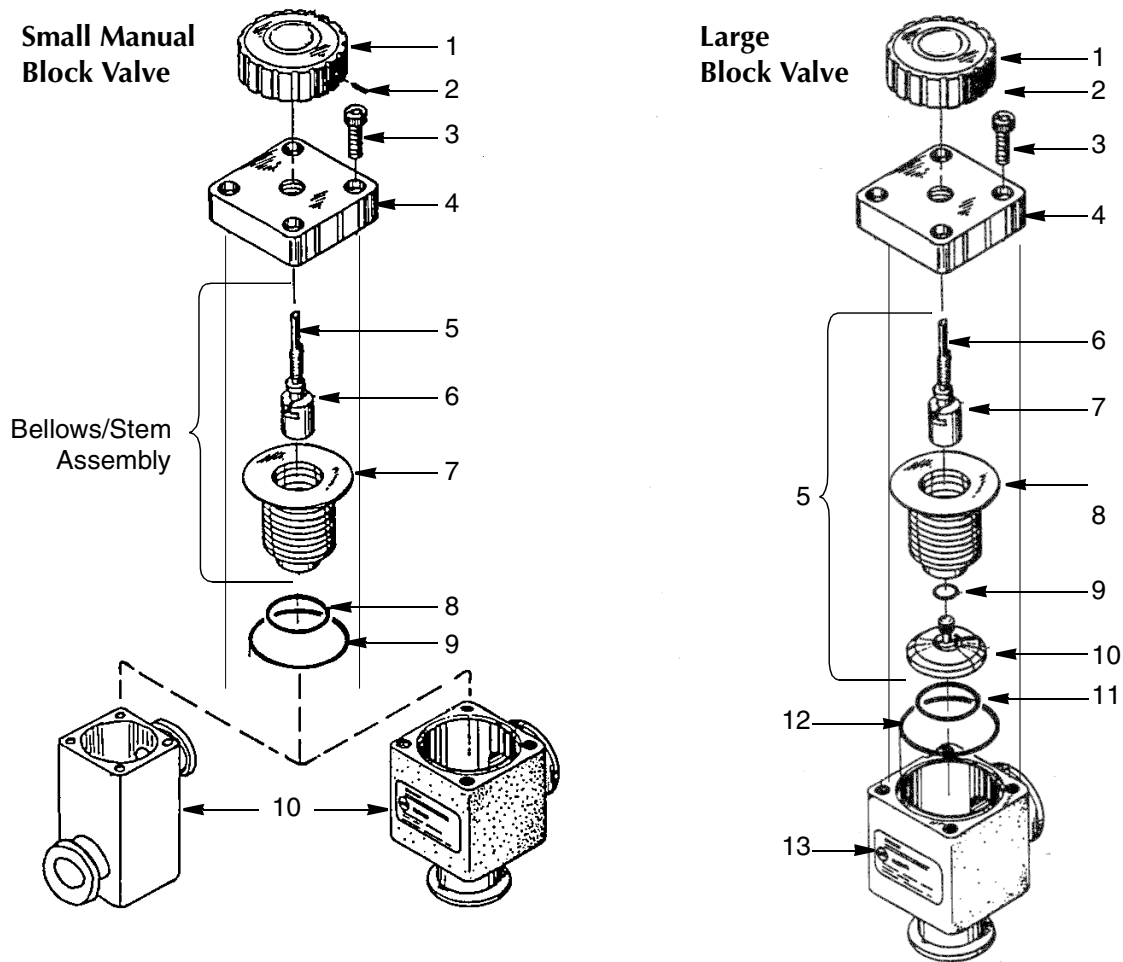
Small and Large Manual Block Valve – Exploded View
